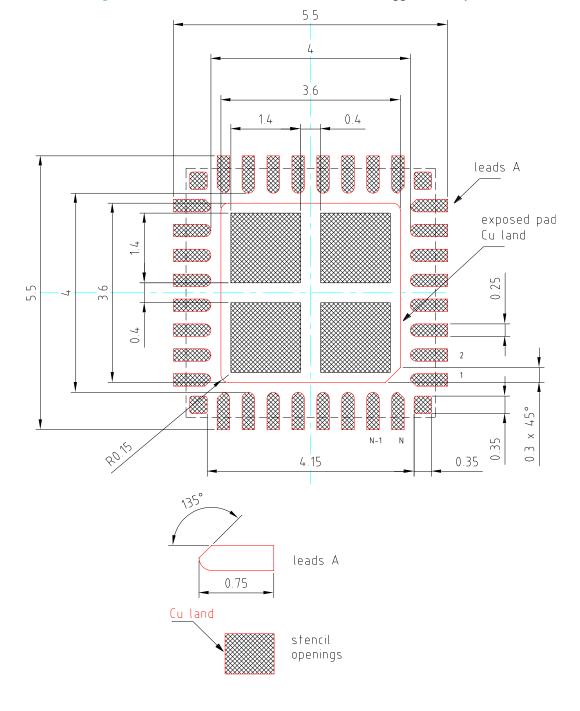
QFN 5x5x0.9 mm 32+4L wettable flanks suggested footprint
